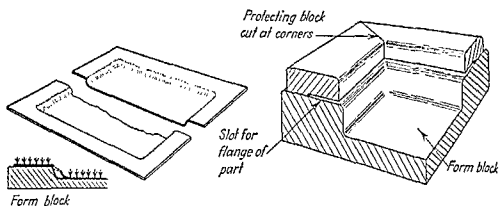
Design of form block to relieve pressure on wide flanges.¹
